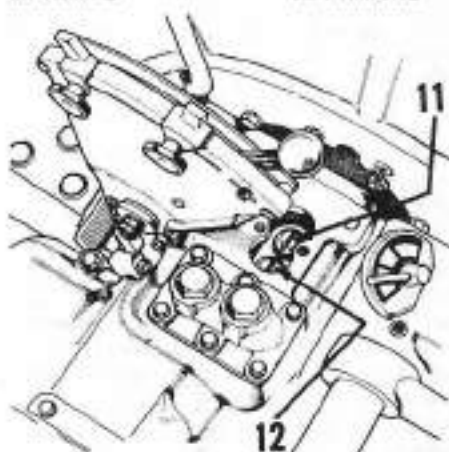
To clean nylon screen in by-pass valve plunger, remove plug (11) and withdraw the spring and by-pass plunger assembly. For exploded view of by-pass plunger, refer to items 5, 6, 7 and 8 in Fig. 198. Hold valve plunger retaining plug is (12).
